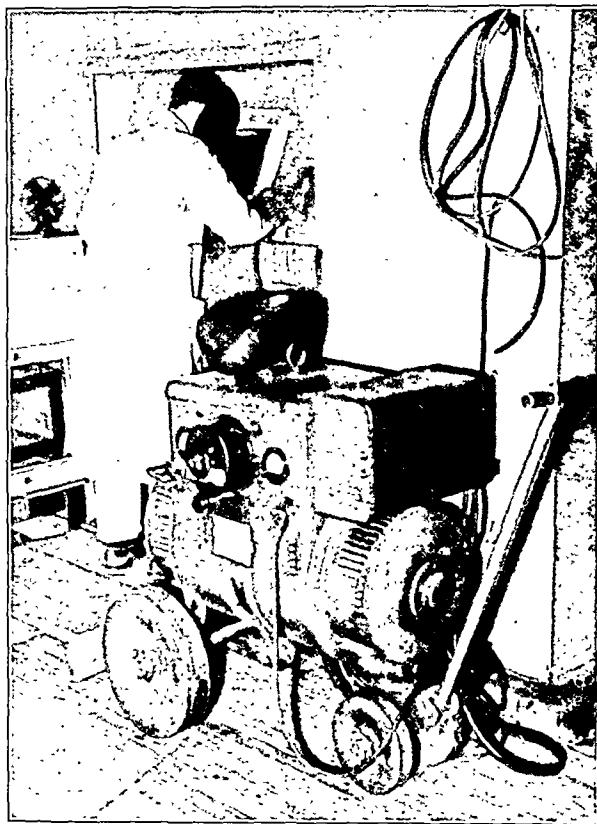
Corner of exterior of experimental welding chamber showing arc welding machine and arrangement for welding through portholes in chamber wall.
